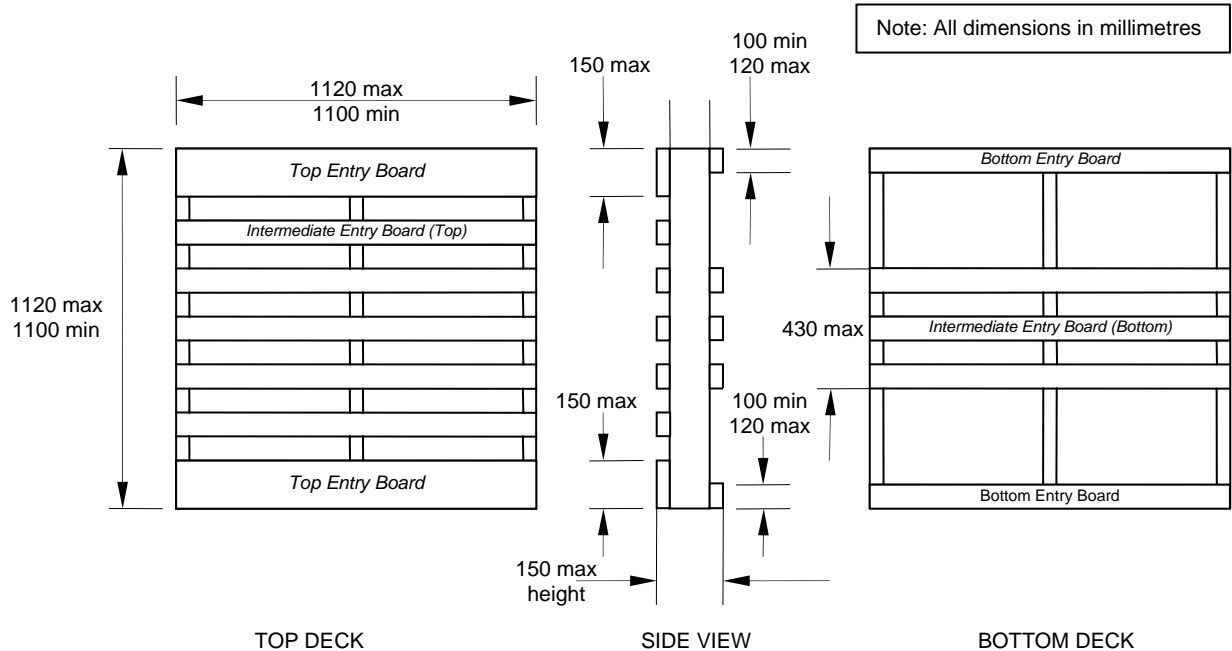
PALLET DIMENSIONAL REQUIREMENTS
